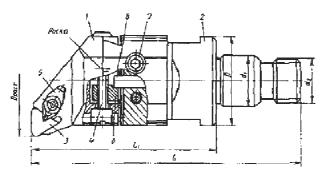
Single-tooth boring head for boring holes with a diameter of 30 ... 150 mm
